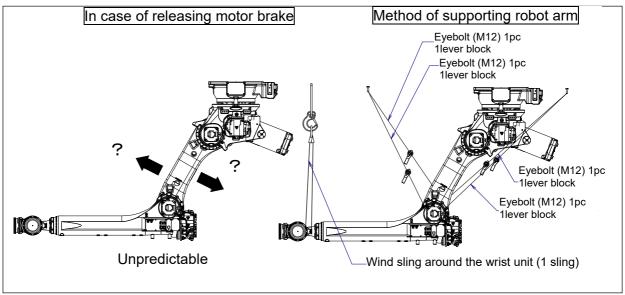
(d) Releasing J2-axis motor brake and measures (R-2000*i*C/190U)
